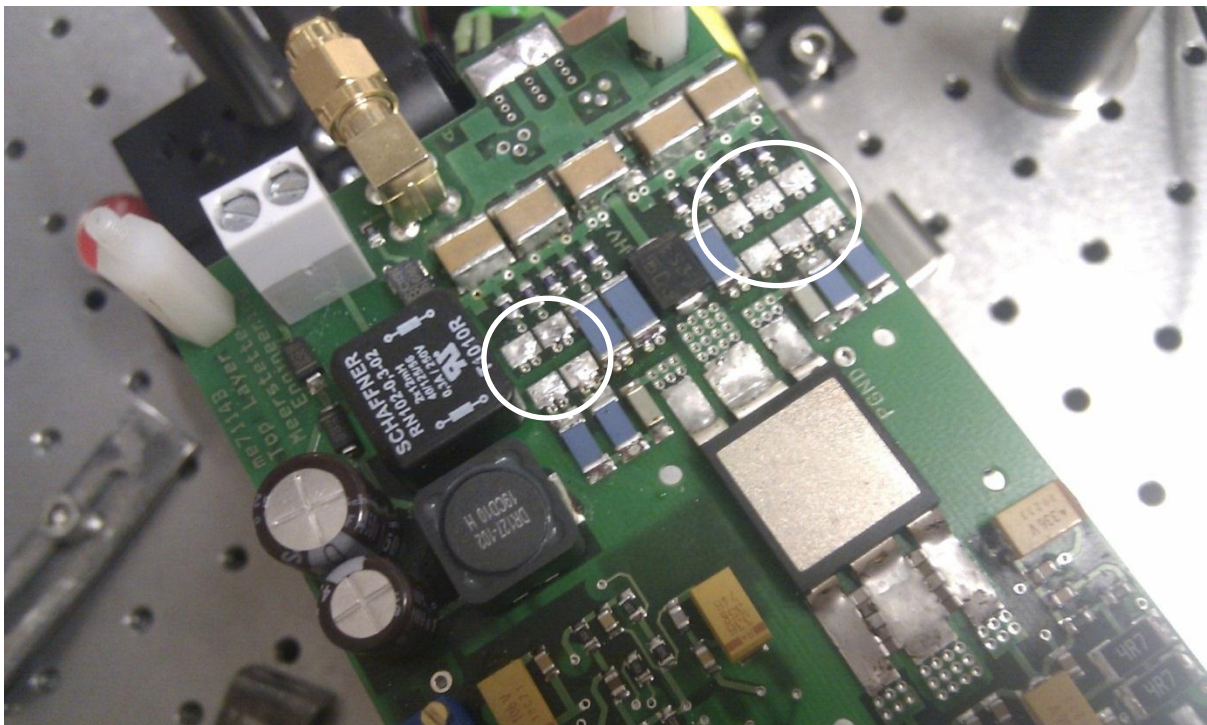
Showing the PCO-7120 with de-soldered resistors.
